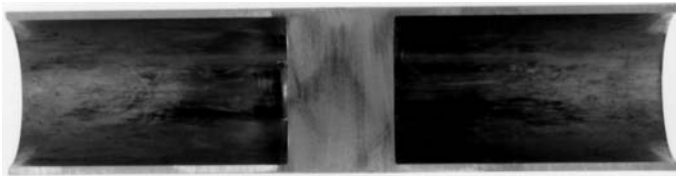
Housing (A7001) of hammer forged by Miyamoto Industry Co.
